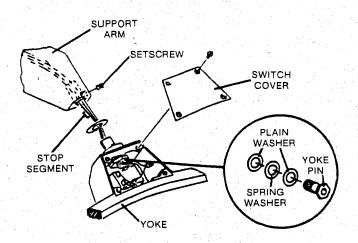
REMOVING LIGHTHEAD/YOKE
